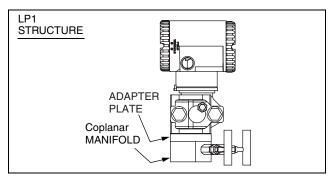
LP1 Shown Mounted to a Coplanar Manifold using an Optional Intermediate Adapter Plate
